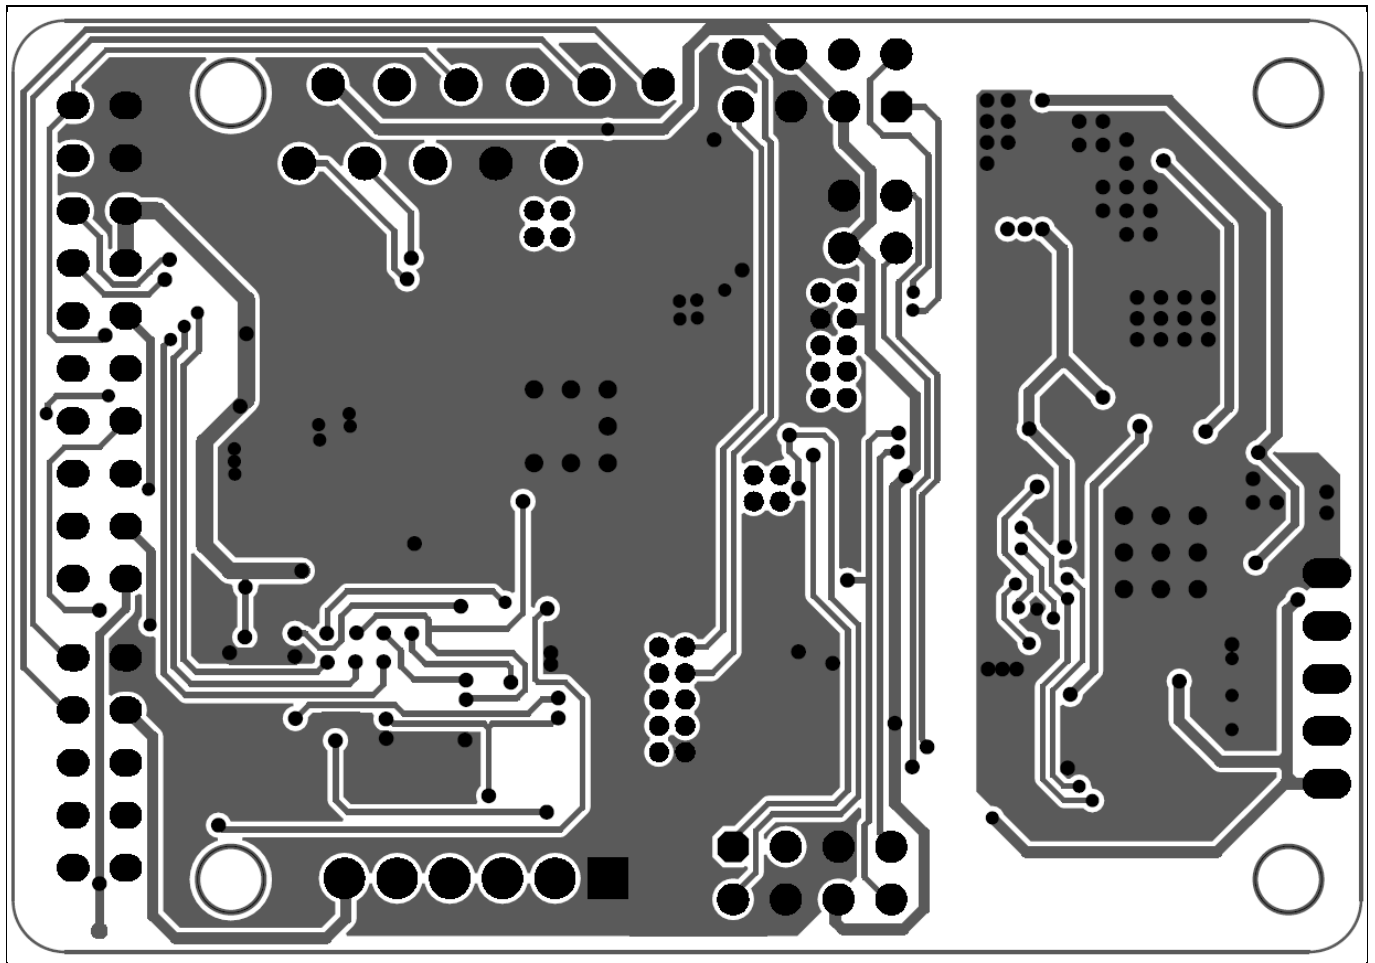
Bottom overlay print of the EVAL-M3-302F evaluation board
